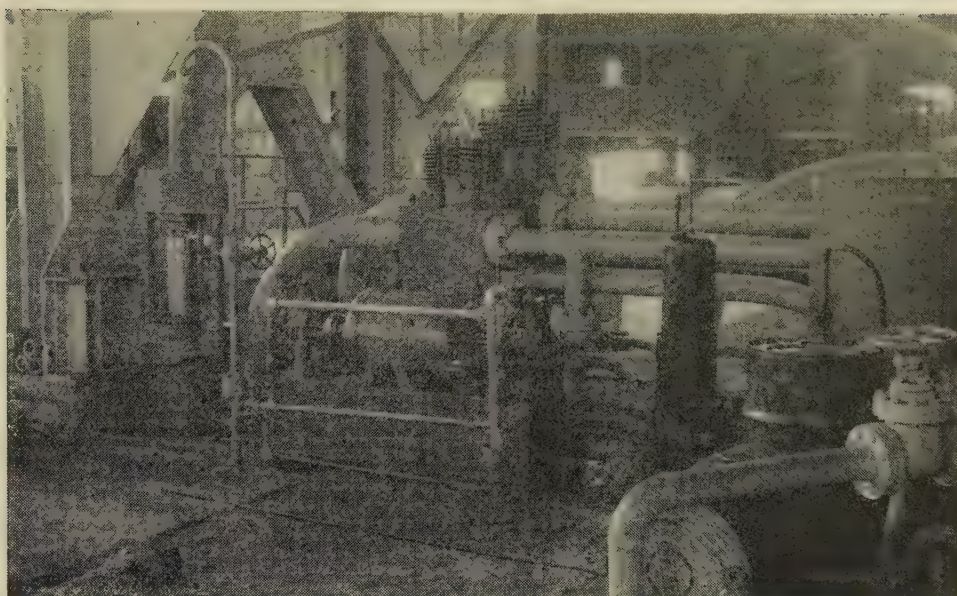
OPERATING CONTROL GEAR, CHARLESTON PRESS
